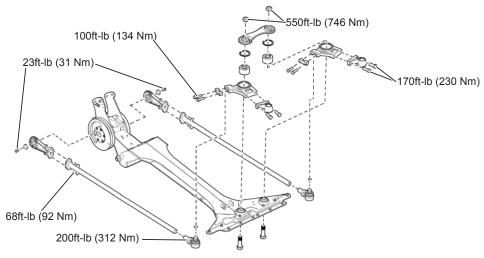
Knife Drive Torque Recommendations (see 15.7 on page 134 for details)
